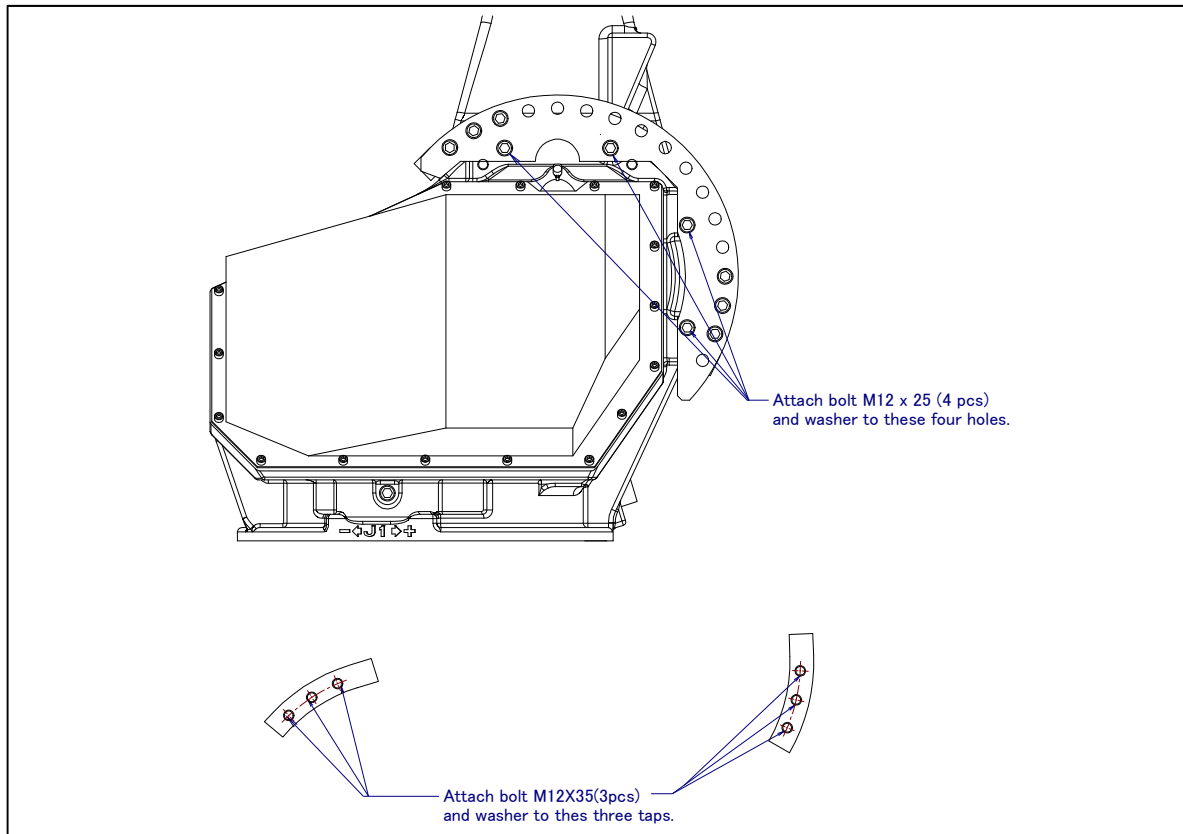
(b) J2-axis adjustable mechanical stopper
